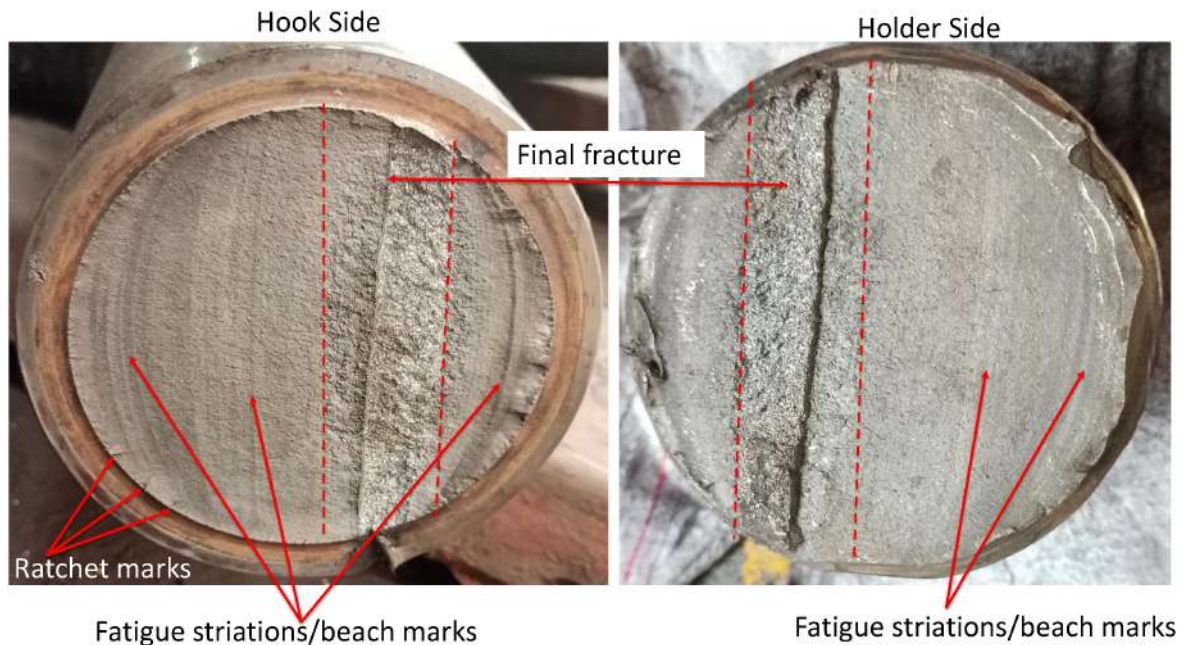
| Visual examination of fracture surface of hook side and holder side showing fatigue striations from both sides with final failure at the center.
